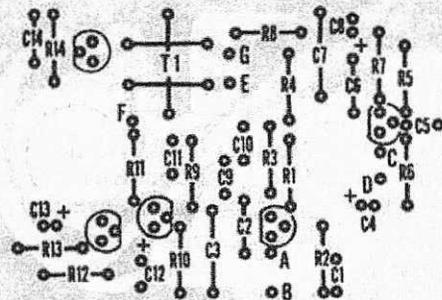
Actual size drawing of foil side of printed circuit (left) will help you make your own board. Parts are installed on the plain side of the board as shown above. Figure 4 shows parts assembled on board.
